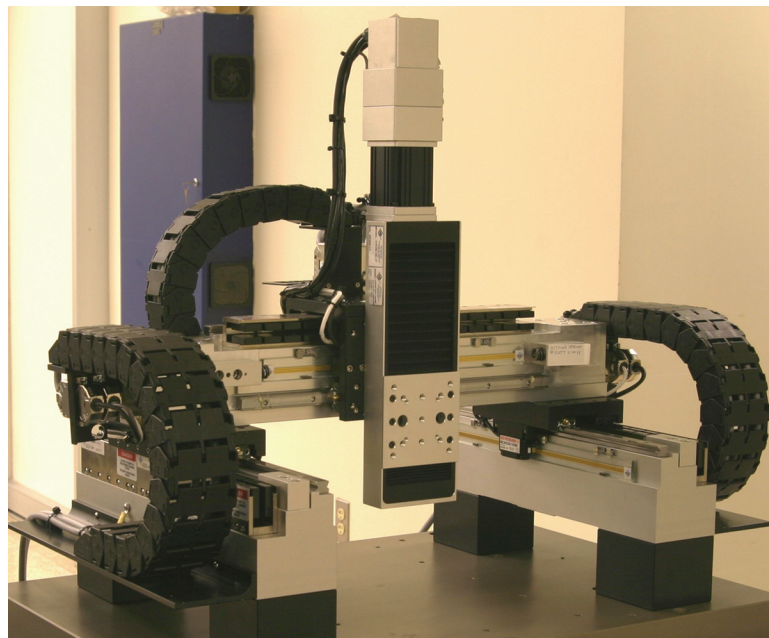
Mechanical bearing system of a customized Robocaster (Aerotech Inc.).
